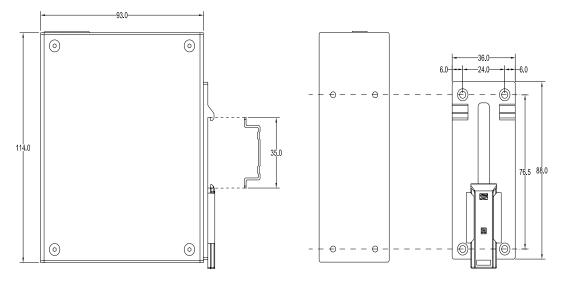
Side View + Back View + Installation Kit of Din Rail Mounted from the Back
